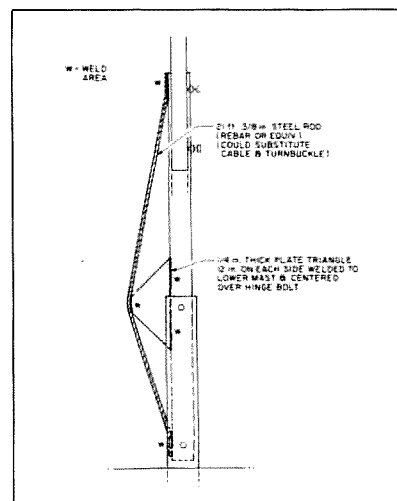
Truss for lower mast section. Use this when adding another section to the tower.
